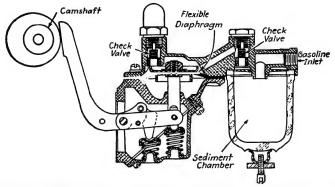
Fuel pump used on Studebaker engine. (A.C. fuel pump.)
